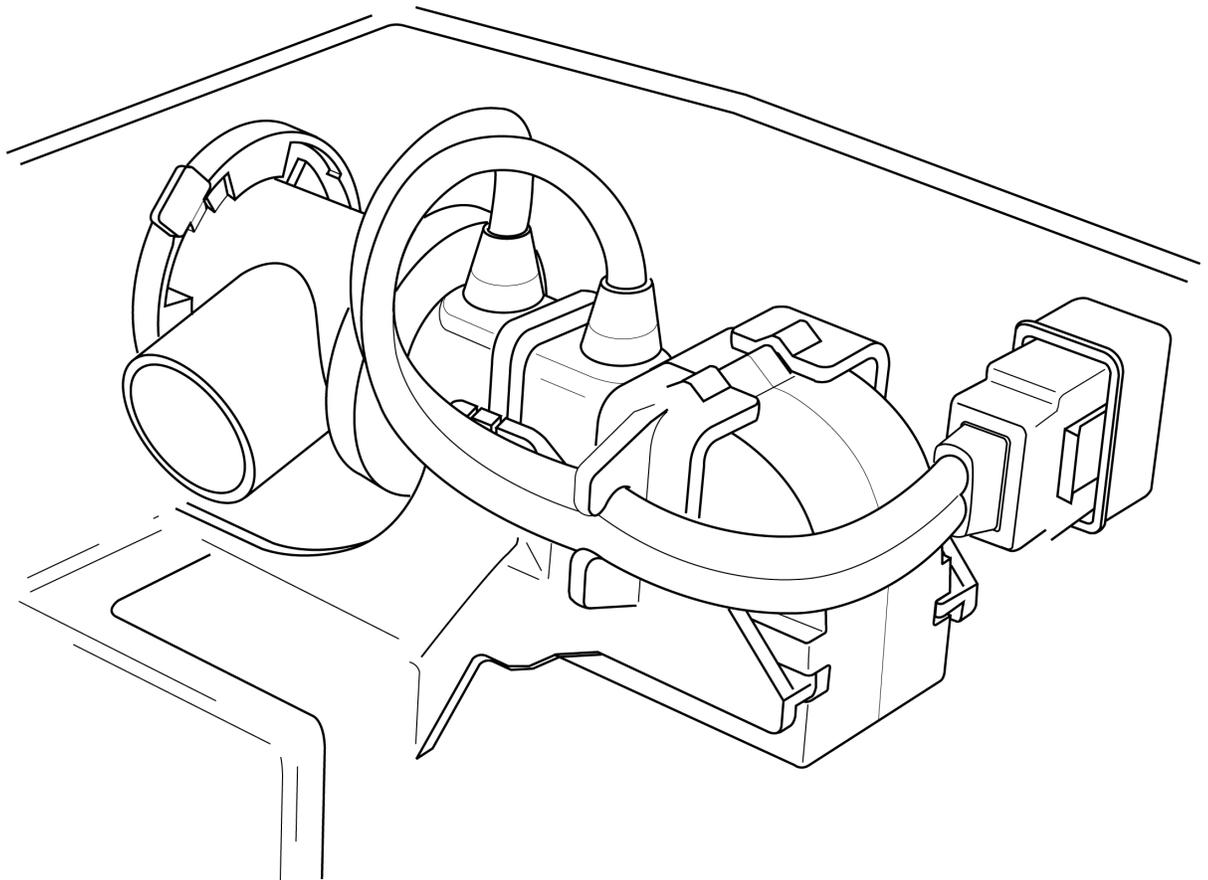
Exhalation Valve and Flow Sensor Assembly
